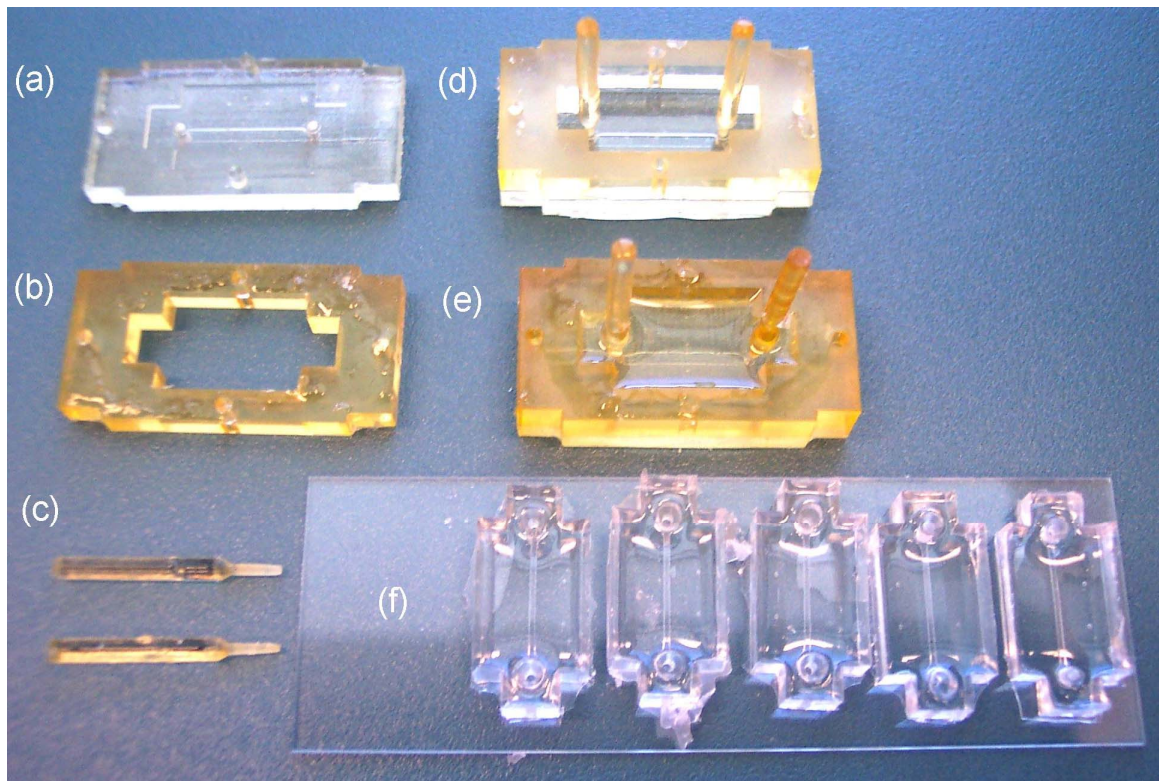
Photograph showing (a), (b), and (c) the SLA mold parts, (d) the assembled mold, (e) the mold filled with PDMS, and (f) the released PDMS channels sticking on a glass slide.
